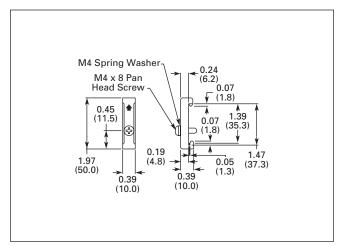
PFP-M DIN Rail End Stop — Approximate Dimensions in Inches (mm)
